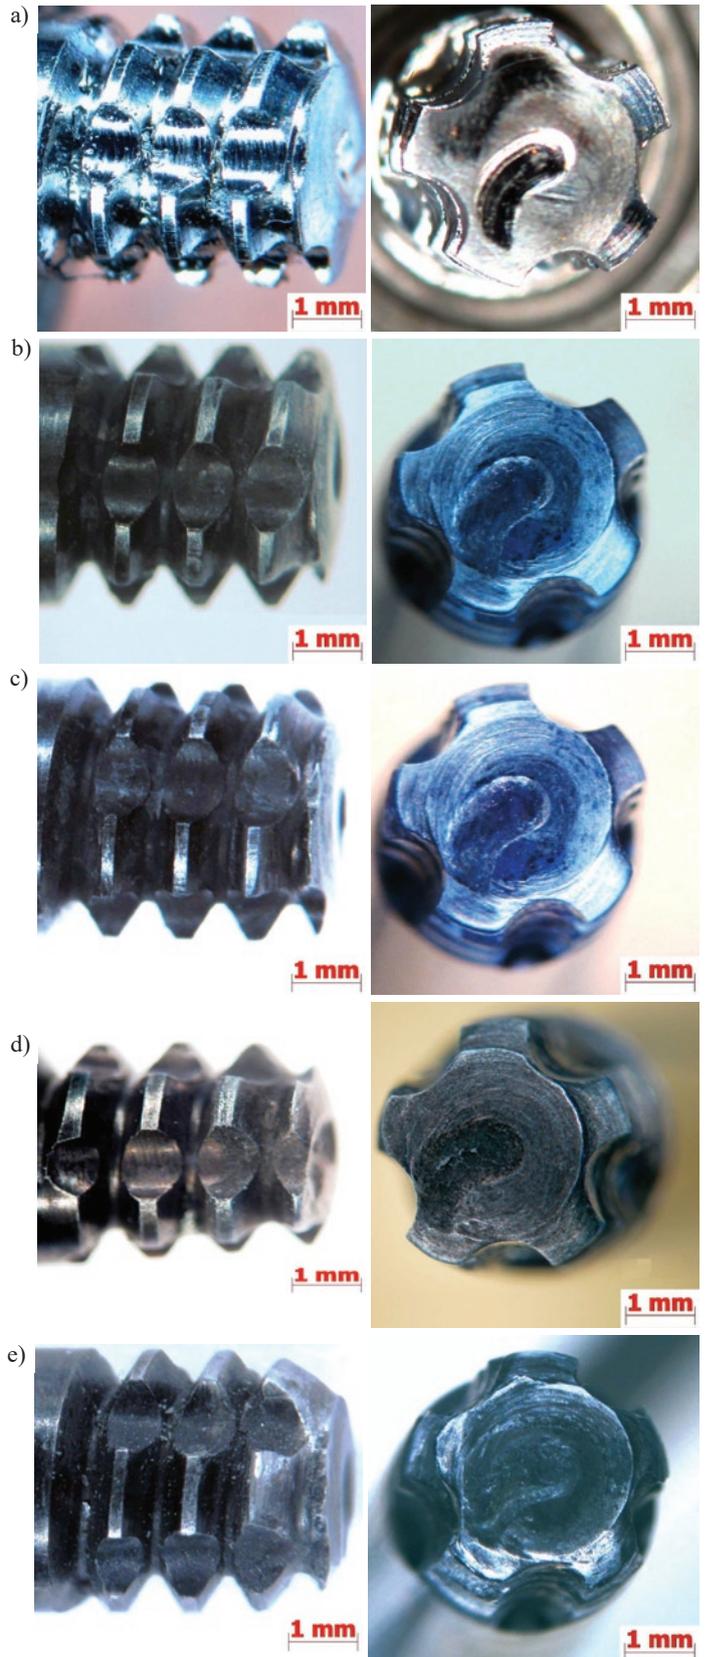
Macroscopic wear analysis of the tool from the side and face for the following welding distances: a) 0m, b) 100m, c) 200m d) 300m, e) 400m.
